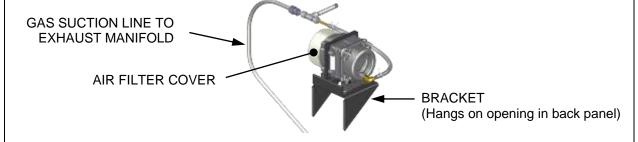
Air Eductor Assembly - BMK5000 & 6000
